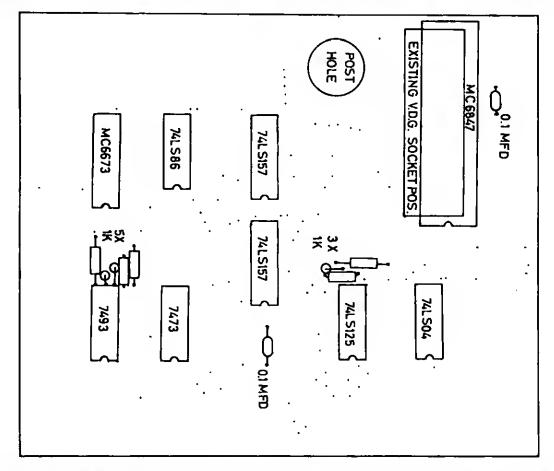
Parts layout for lowercase modification, viewed from above. Three resistors are mounted vertically, but enough resistor lead should be left to bend the parts over after soldering.
